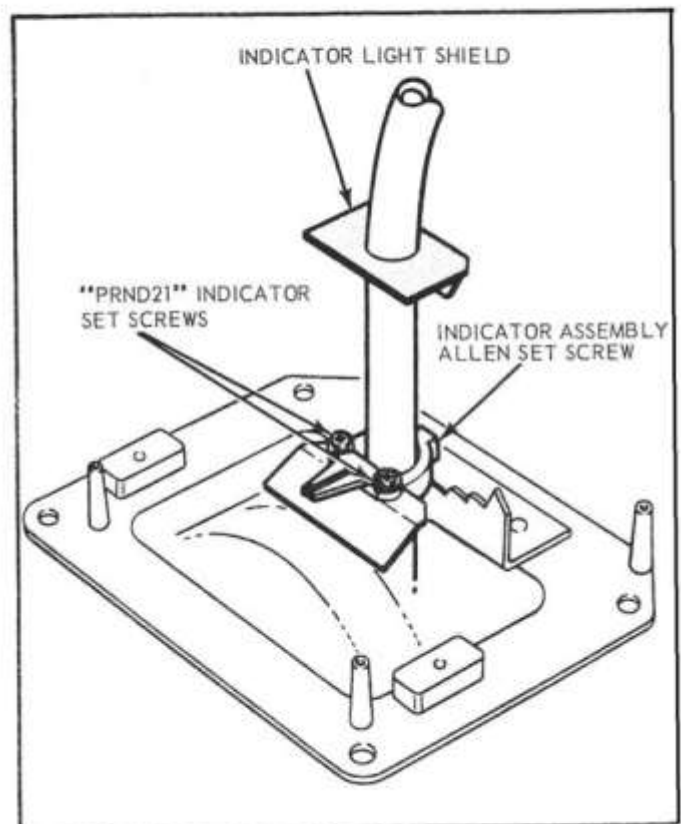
Transmission Shift Lever "PRND21" Indicator Adjustment 9035B
